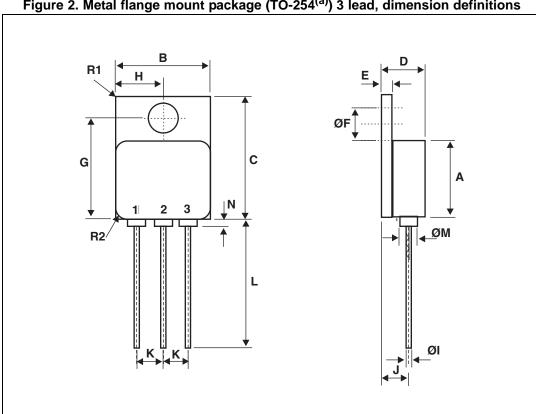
Metal flange mount package (TO-254^(a)) 3 lead, dimension definitions
